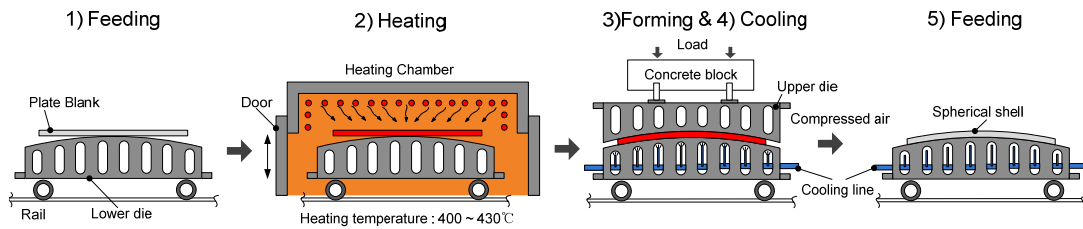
Hot curvature-forming process of large thick Al plate using grid-typed die
